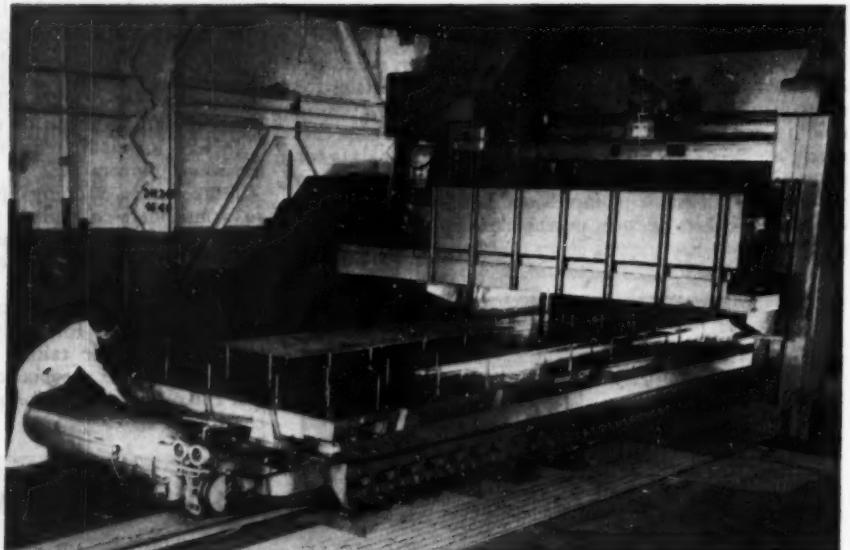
The 10 x 40-ft worktable of the spar-and-skin mill is dotted with vacuum chucks which help hold parts in place and pneumatic lifters which aid in removing large finish-machined parts from the table. A feature of the 250-ton mill is its completely welded table which is made up in two 20-ft sections, including integral ribbing, table top, and supports.
